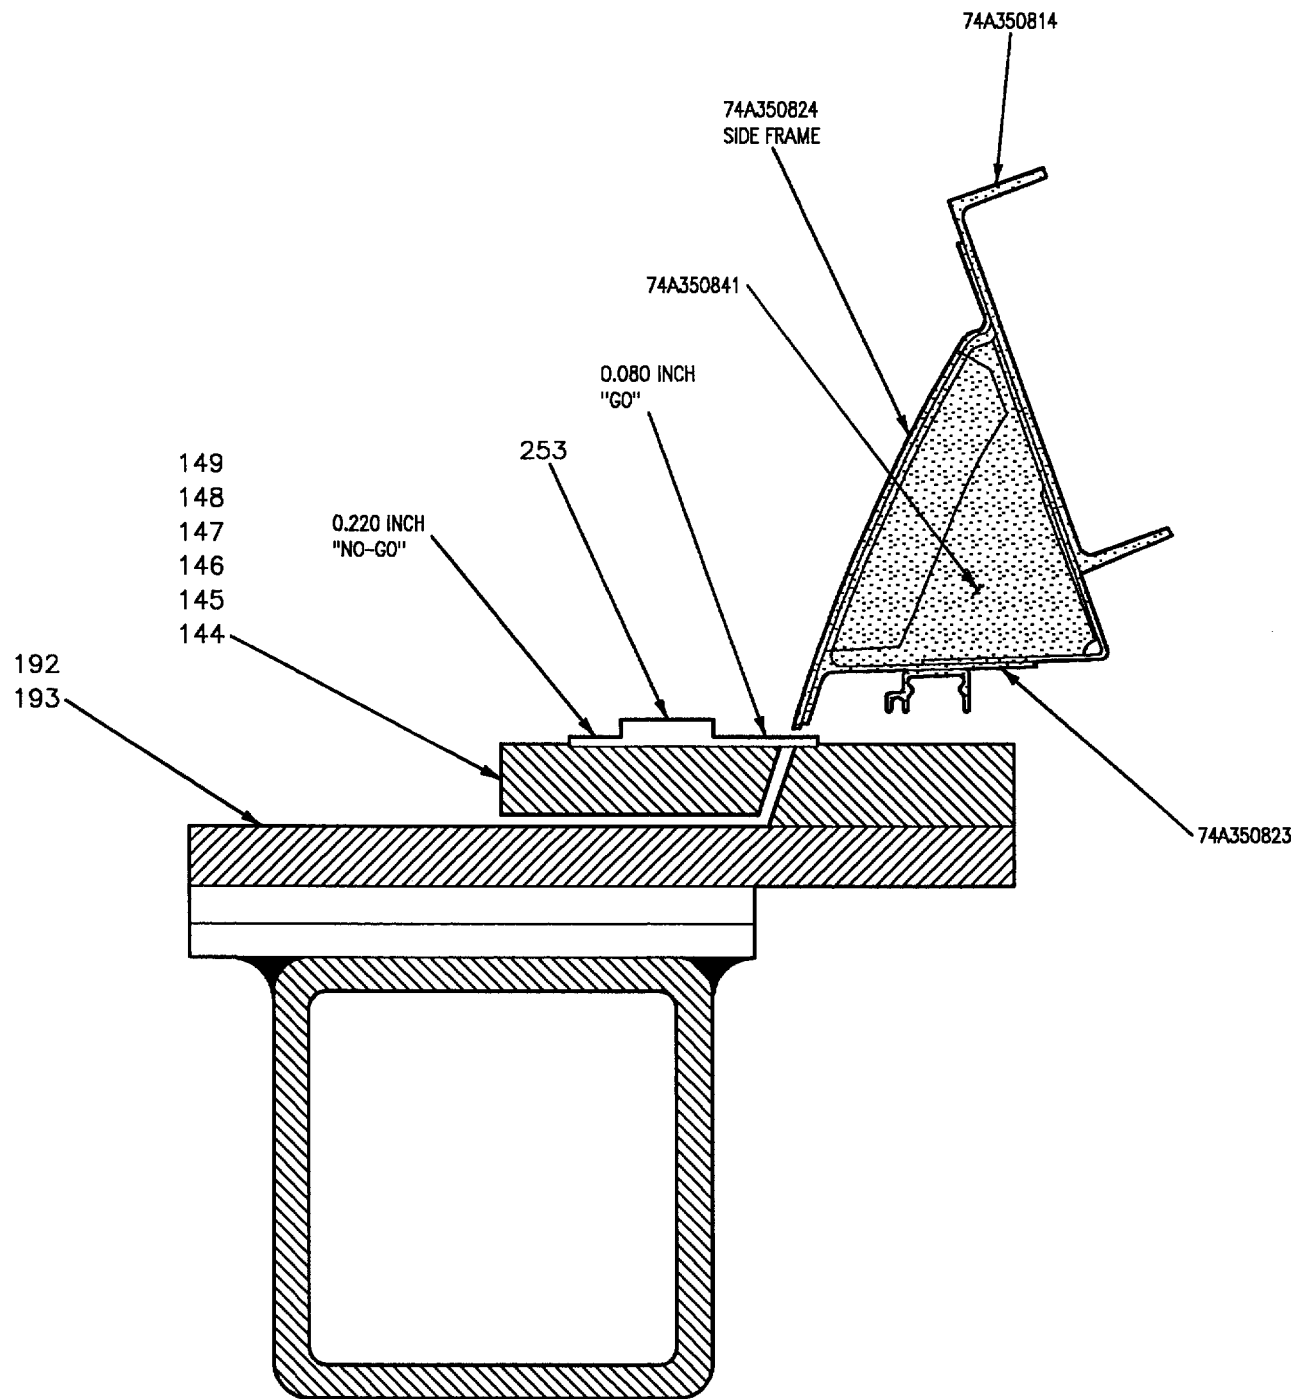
Inspection or Replacement - Side Fairing (Sheet 1)
